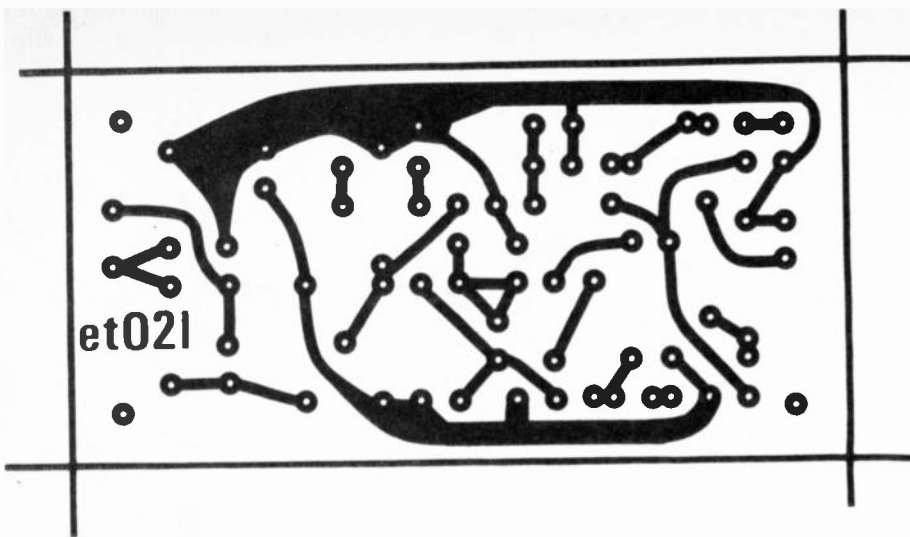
Foil pattern of the printed circuit board — reproduced full size.
